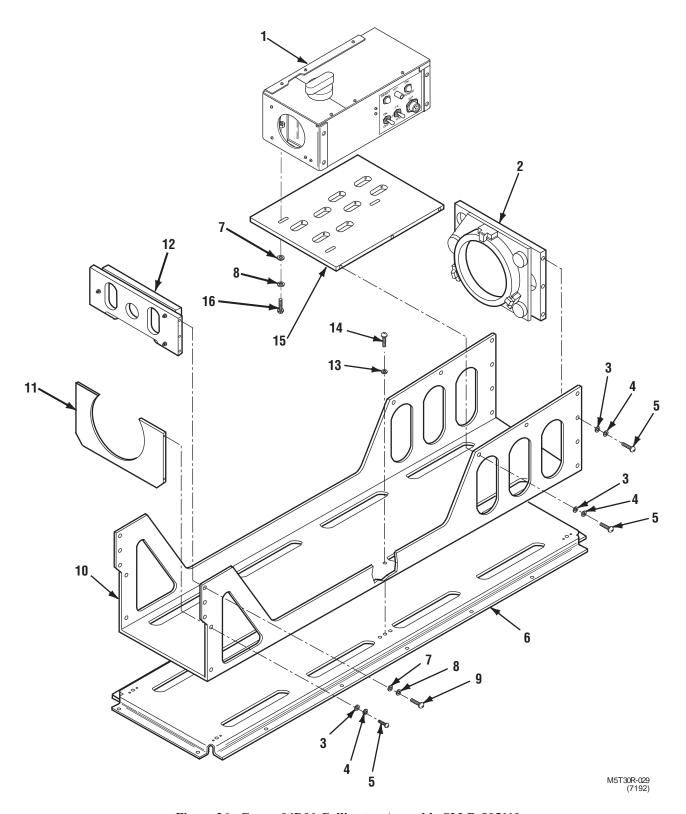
Group 04D01 Collimator Assembly SM-D-805110
